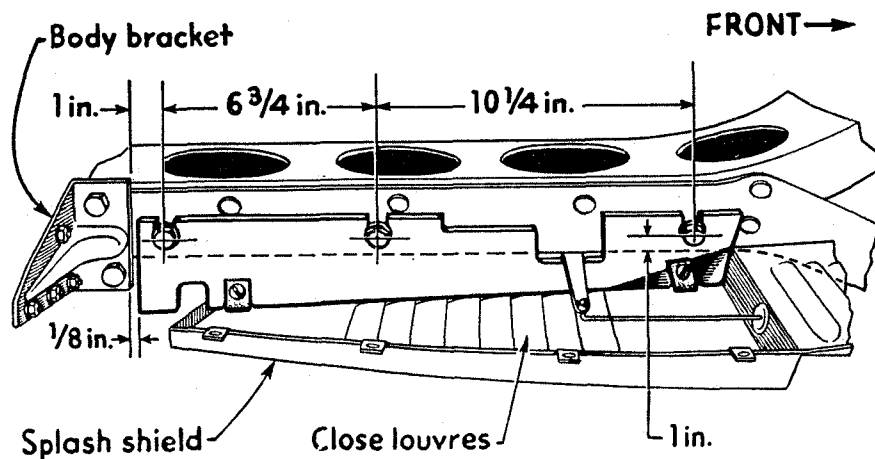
Cadillac R. H. Baffle. The baffle should be adjusted so that the rubber bumpers bear against the splash shield before tightening the bolts to the frame.
